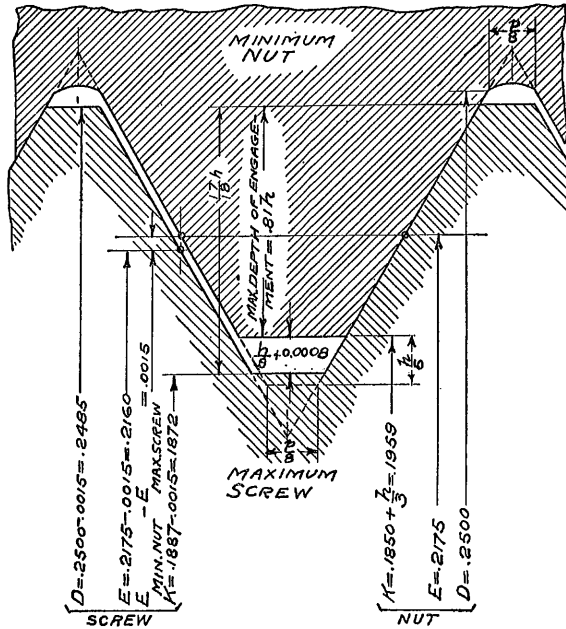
Illustration of tightest condition for class 1 fit, one-fourth inch, 20 threads.
